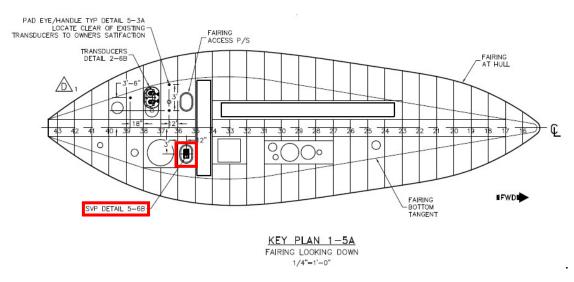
Line drawing showing the placement of the SVP probe on the transducer fairing.
